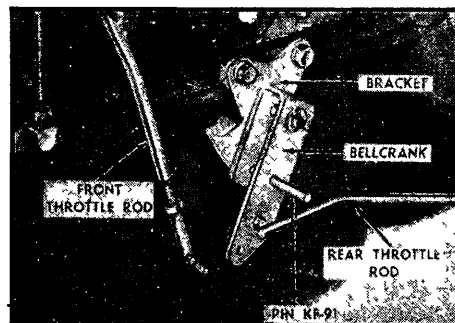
Adjusting pin installed in lower bellcrank. 1950-52 Hydra-Matic
